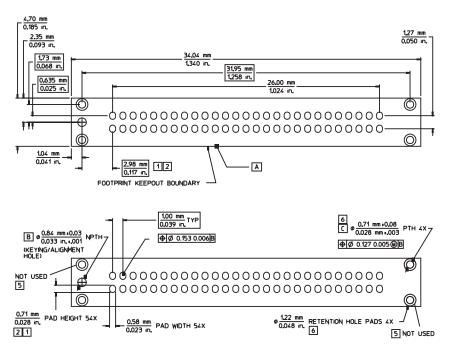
Pro Series soft touch footprint dimensions (see drawing notes)
